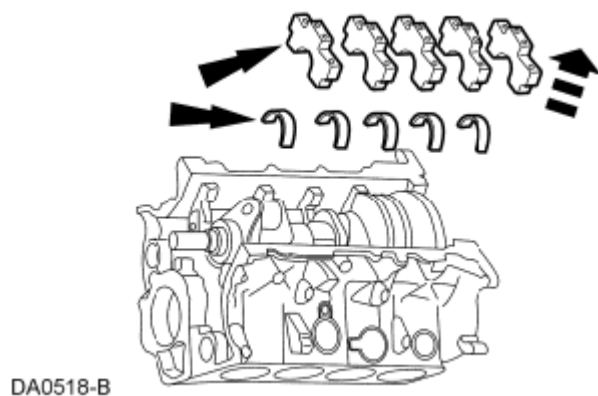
Identifying Main Bearing Caps, Lower Crankshaft Main Bearings And Lower Thrust Washer
